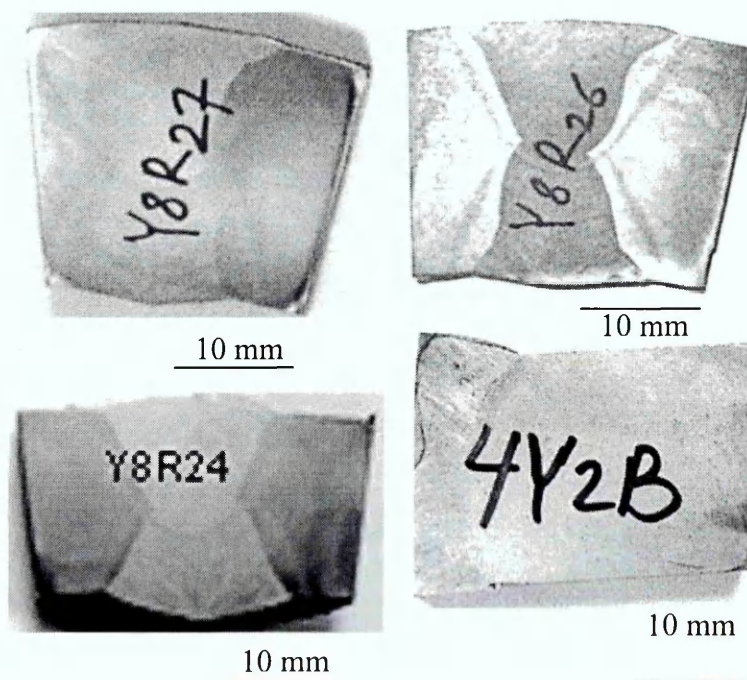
Schematic illustrations of the welded specimens used in the SVET tests.
